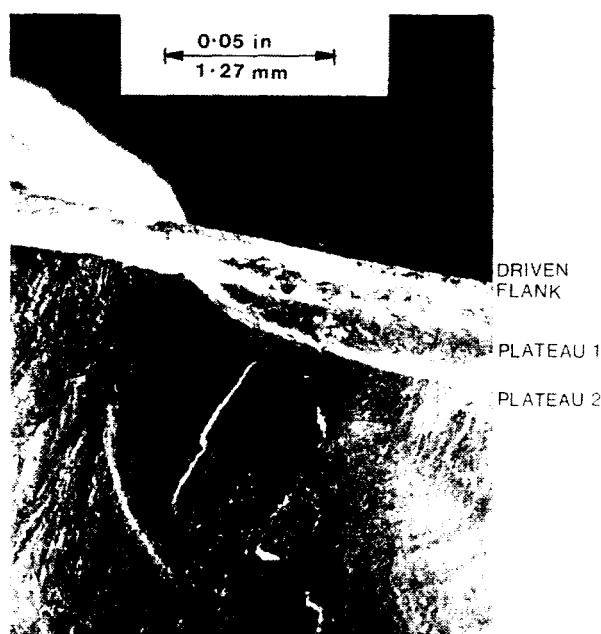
VIEW OF TOOTH FRACTURE FACE SHOWING ORIGIN OF FATIGUE FRACTURE
